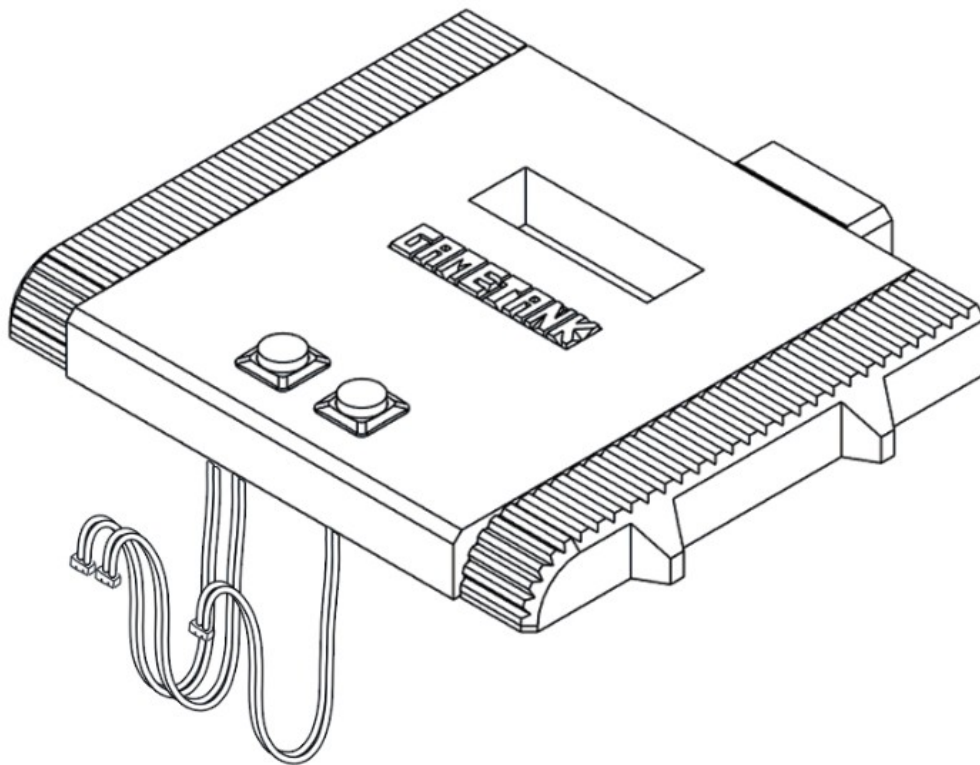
Thread button wires through button holes, fasten buttons with threaded collars
